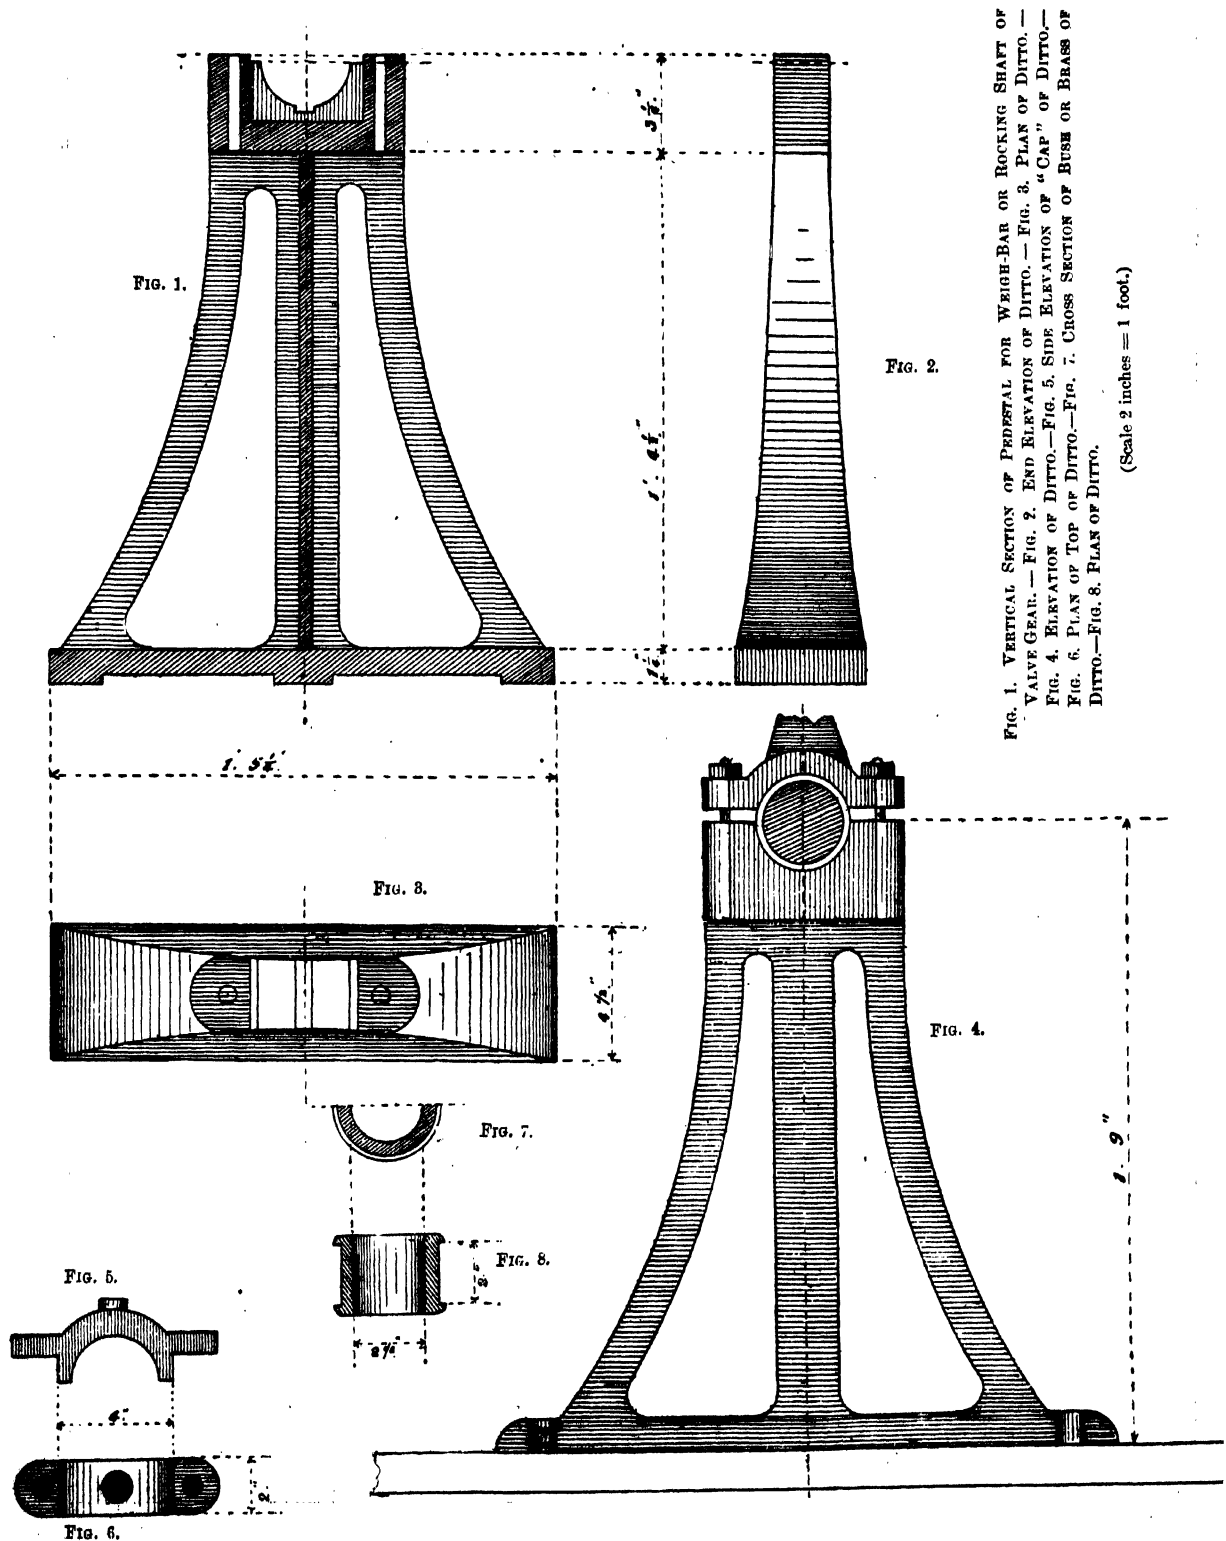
VERTICAL SECTION OF PEDESTAL FOR WIGGE-BAR OR ROCKING SHAFT OF VALVE GEAR. — FIG. 2. END ELEVATION OF DITTO. — FIG. 3. PLAN OF DITTO. — FIG. 4. ELEVATION OF DITTO. — FIG. 5. SIDE ELEVATION OF "CAP" OF DITTO. — FIG. 6. PLAN OF TOP OF DITTO. — FIG. 7. CROSS SECTION OF BUSH OR BRASS OF DITTO. — FIG. 8. PLAN OF DITTO.
